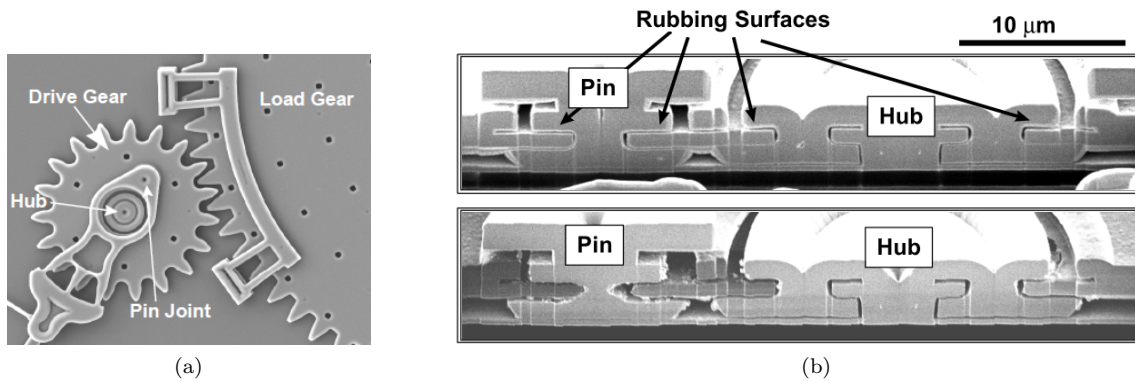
The pin (joint) connects an actuator to the drive gear. The hub is anchored to the substrate. The pin rotates when the gear turns around the hub. (a) A top view of the gears and joint. (b) A cross section of the pin and hub. The top figure shows no debris, but after 480k cycles, there is failure and a lot of wear that is shown in the bottom figure [2].
